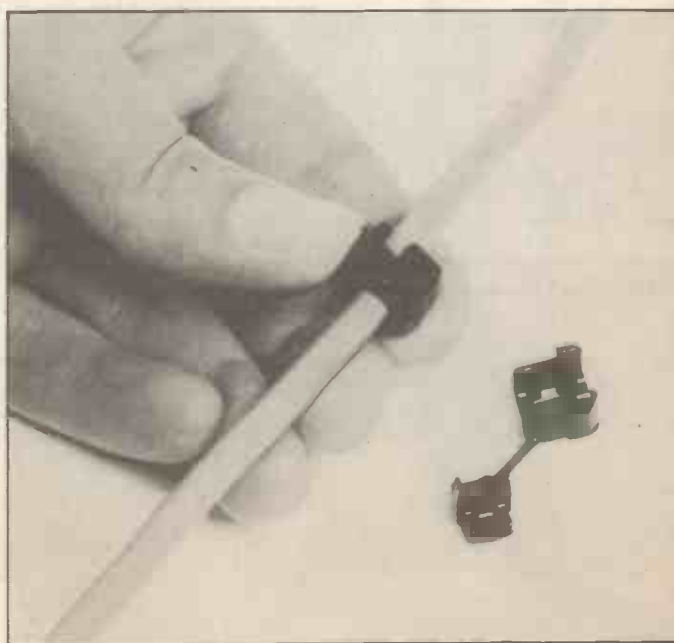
Two-part cable bushes. Once pushed into the drilled hole of a case, these bushes hold the cable securely
